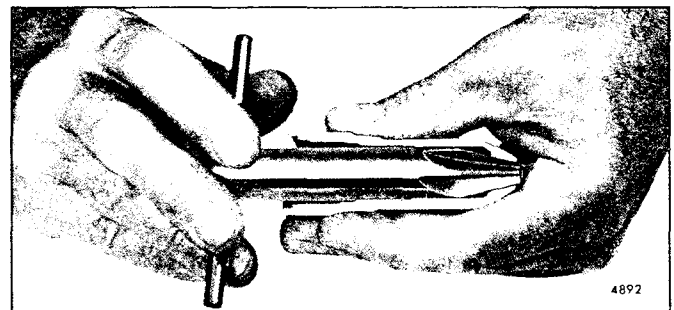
Cleaning Injector Nut Lower End with Tool J 9418-5
